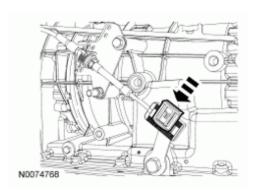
Locking Transmission Selector Lever Cable Lock Tab Courtesy of FORD MOTOR CO.
